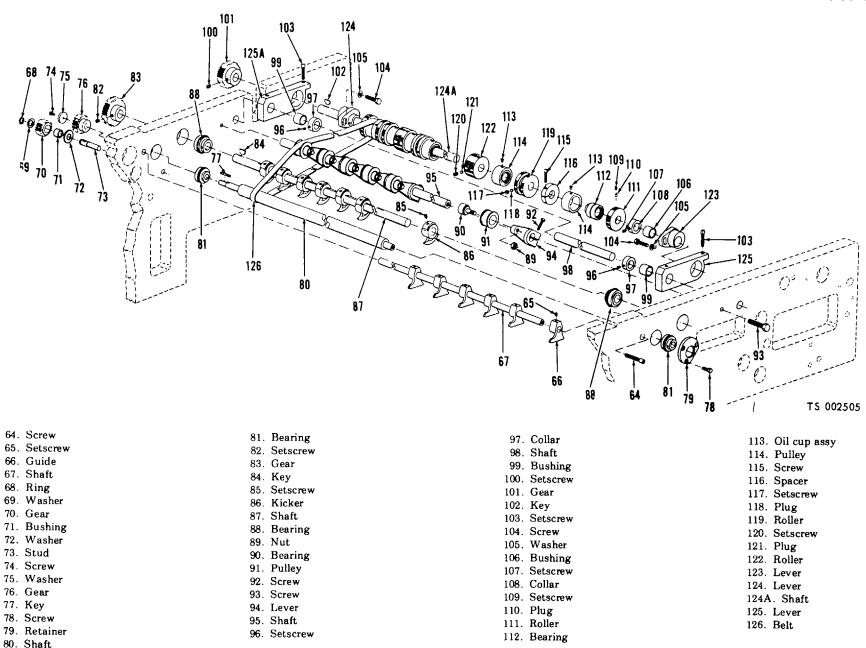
Slowdown sheeter alignment assembly (Sheet 2 of 7). 4-106
